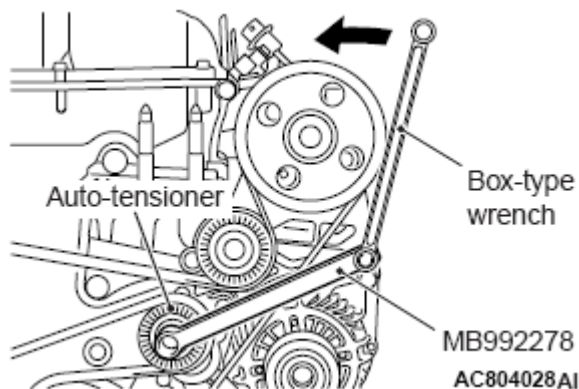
Rotating Pulley Bolt Of Auto-Tensioner Counterclockwise
